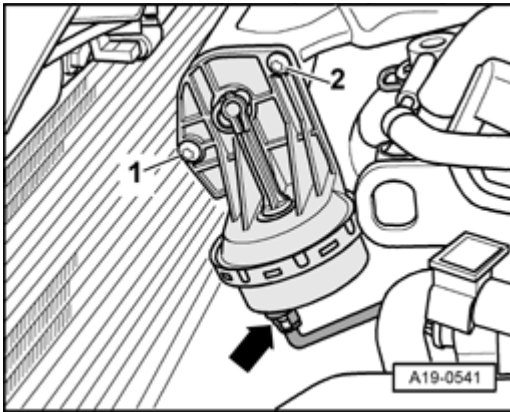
Disconnecting Vacuum Hose At Vacuum Unit For Intake Manifold Change-Over
